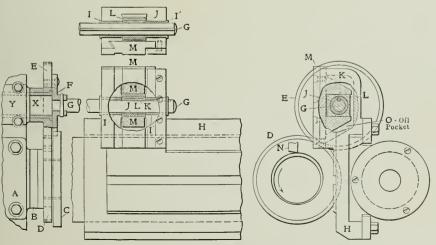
Eccentric Turning Mechanism for Piston Rings
